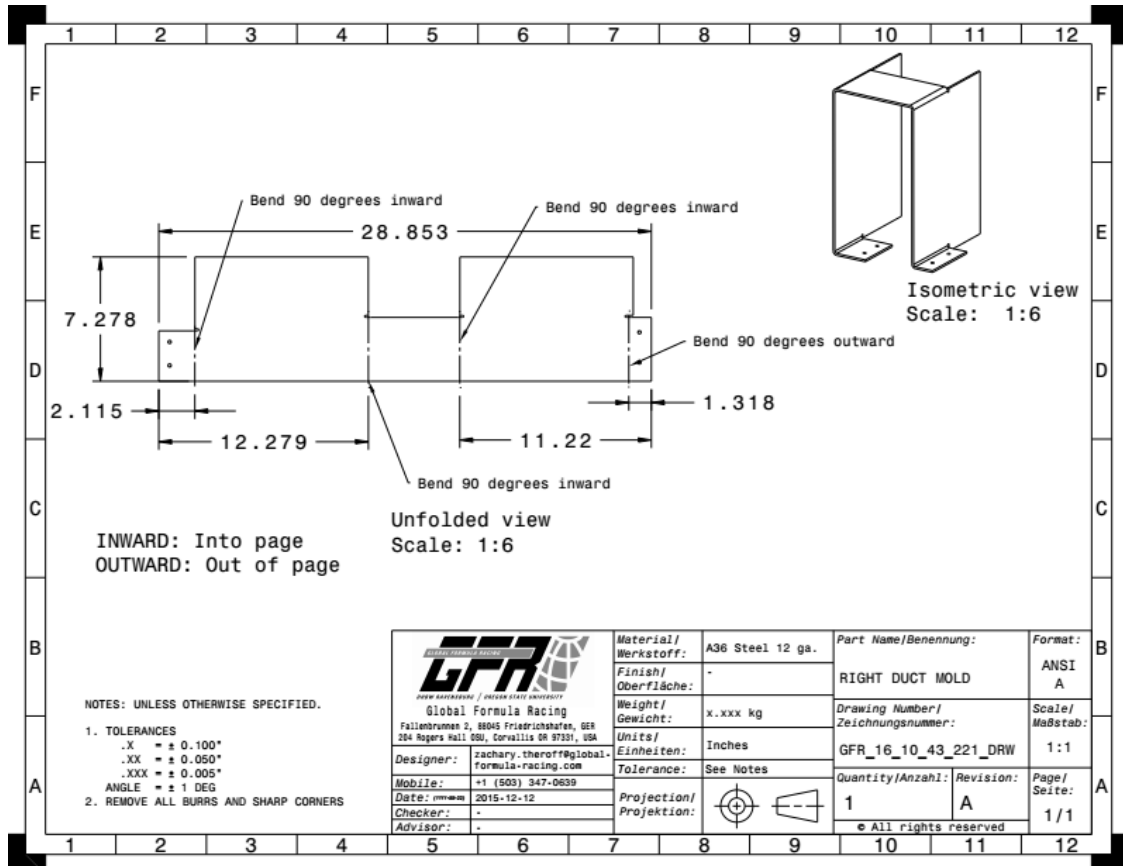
Mold for the right front duct, single piece version; sent to GK Machine but was not deemed manufacturable. Two piece version welded together instead.
